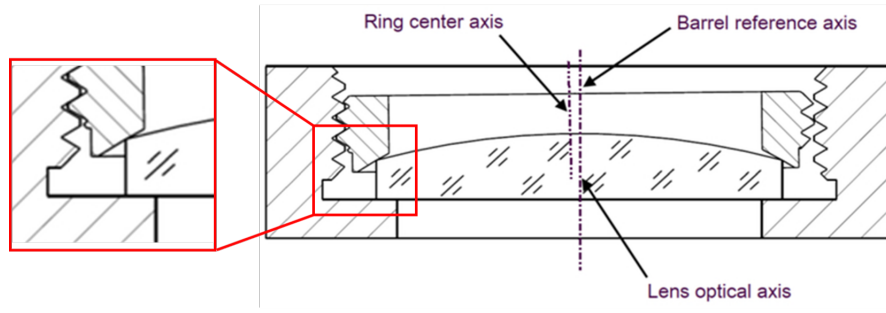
This self-centered edge contact mount utilizes a spherical surface on the retaining ring to achieve self-centering. [51]
